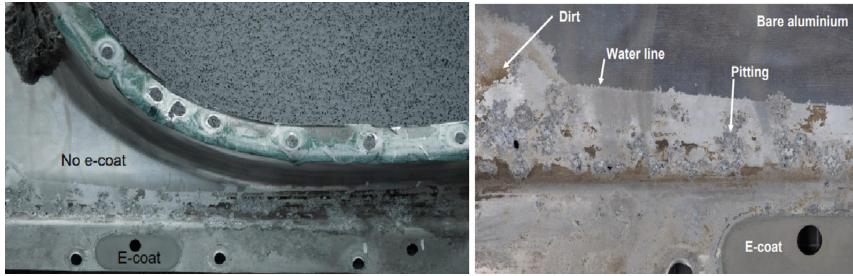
Left hand doorsill outer surface (top) and inner surface (bottom). Inside surface showing 'water' line, dirt and pitting corrosion
